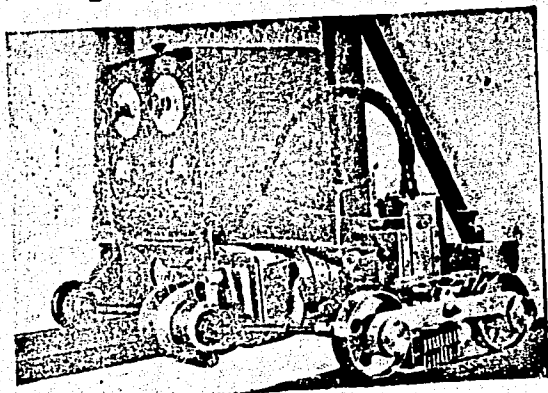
General view of a machine for welding large-size work by gas heat carriers.
